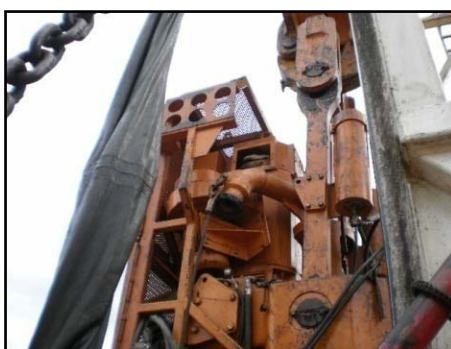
Blower motor assembly detached due to mounting bolts shearing
